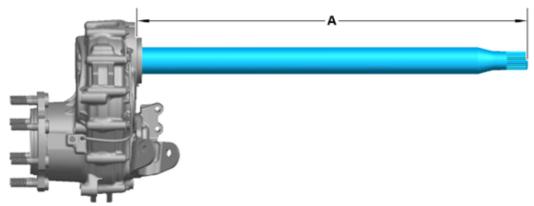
Left hub reduction gear, (A) installed dimension 727.2mm ±1.5mm
